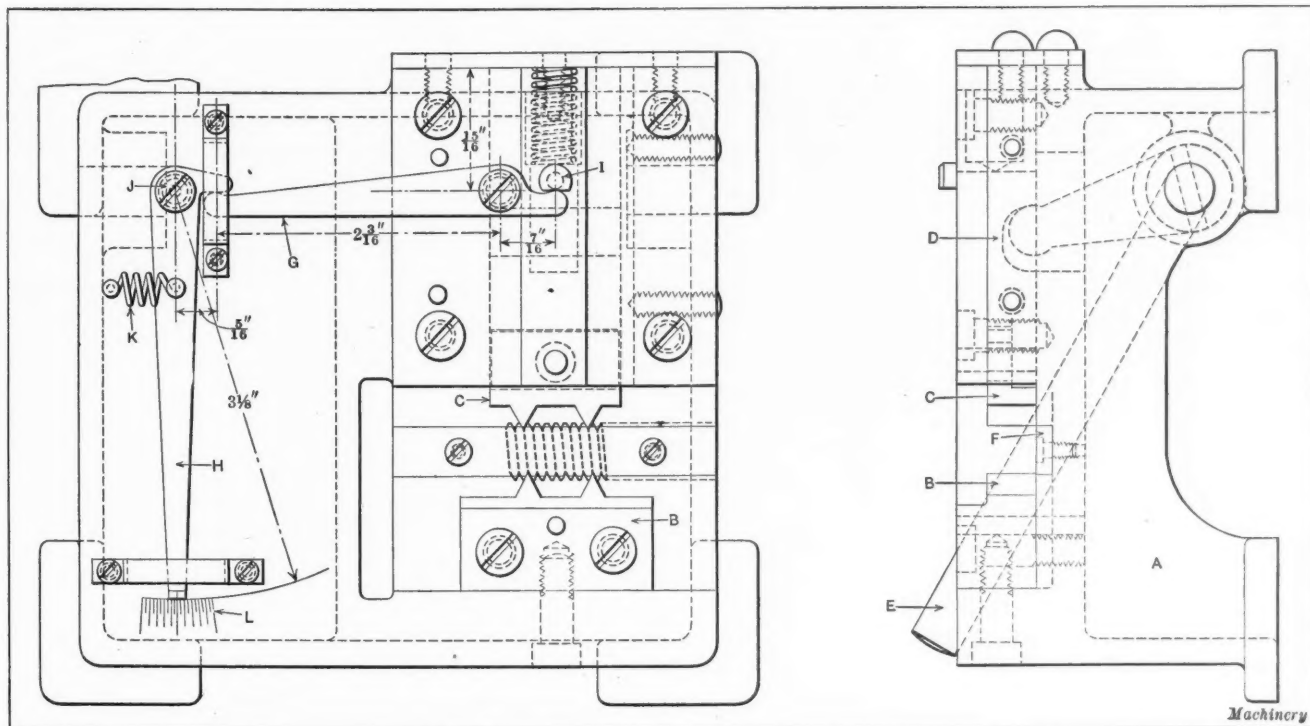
Indicating Gage for inspecting Lead and Pitch Diameter
